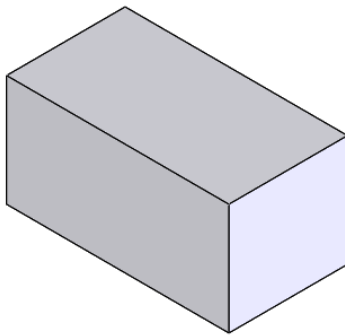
Face deleted with the Delete and Patch radio button selected
